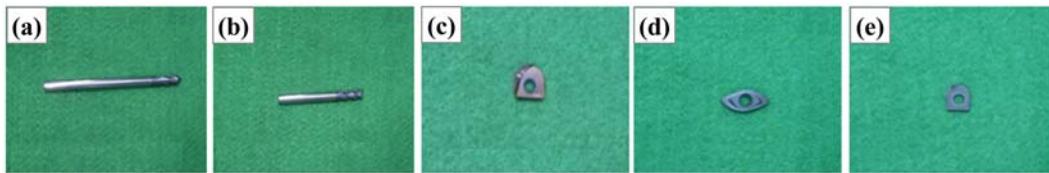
Cutting tools for machinability test: (a) ball end mill for round surface, (b) flat end mill for flat surface, (c) YG-1 ball insert, (d) Hitachi ball insert, (e) Walter ball insert (YG-1, Hitachi and Walter represent the tool makers).
